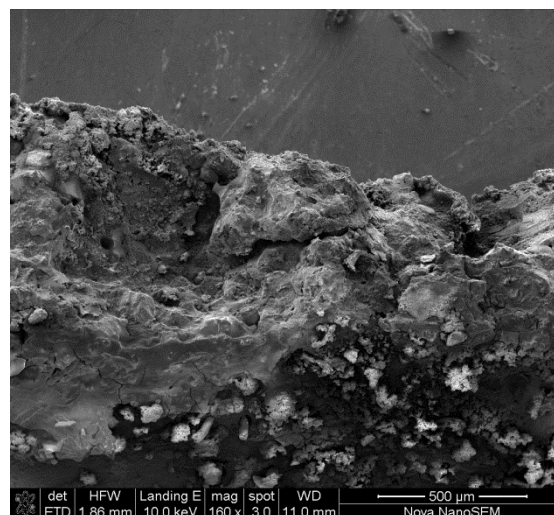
Post-cracking corrosion on fracture surface of 570°C temper U-bend specimen
